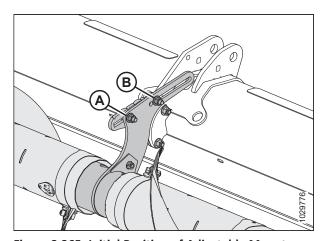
Initial Position of Adjustable Mounts – Two-Piece Auger
